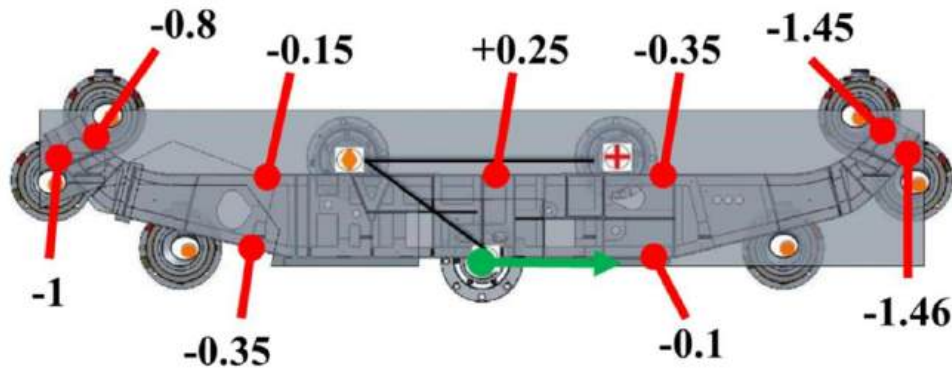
Final measurement results of manufactured part after unclamping from the fixture.
